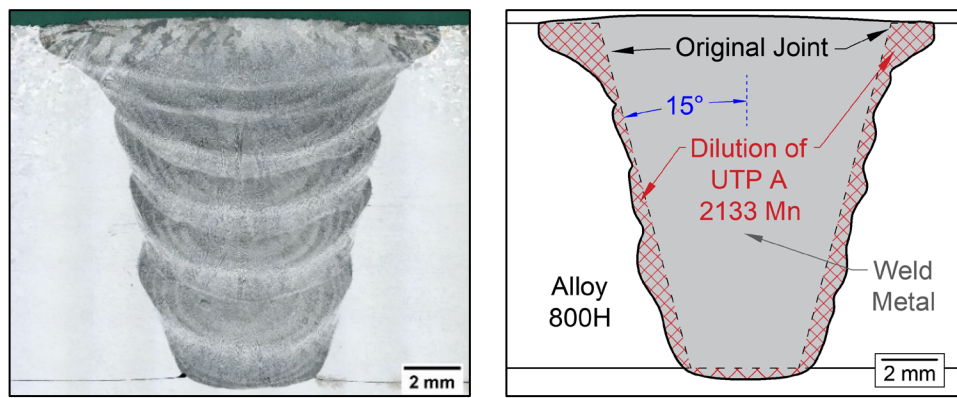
Alloy 800H welded with UTP A 2133 Mn filler metal transverse cross section (left) and estimated dilution of base metal in weld metal from the traced schematic (right).
